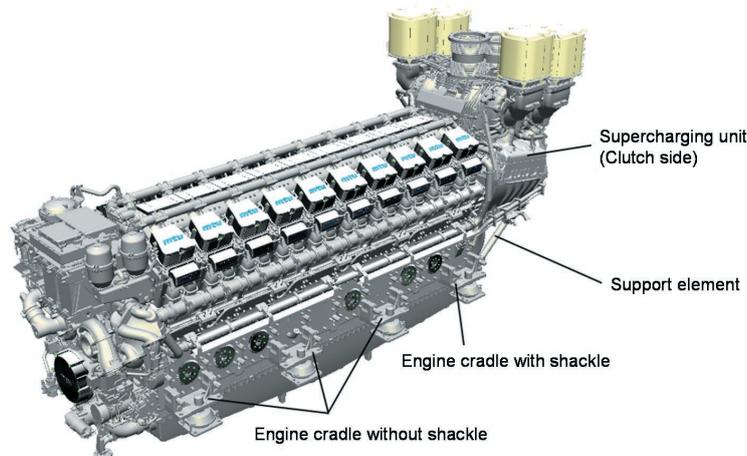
High performance diesel engine (Model MTU 20V 8000) with four engine cradles each side. One engine cradle is shown with mounting supports for the overlaying transmission turbocharger and inter-cooler bracing
